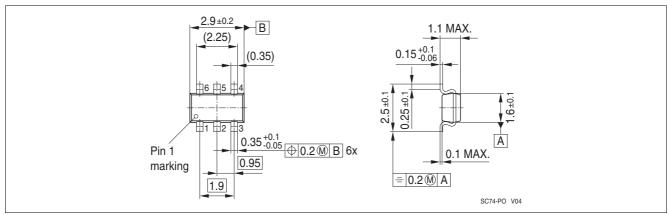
Package Outline for SC74 (dimensions in mm)
